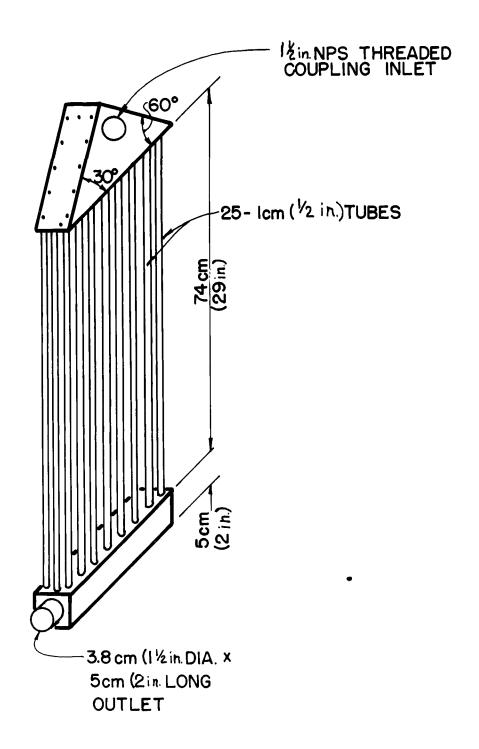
Single pass stainless steel cooler-condenser on 1974 Chevrolet Nova
